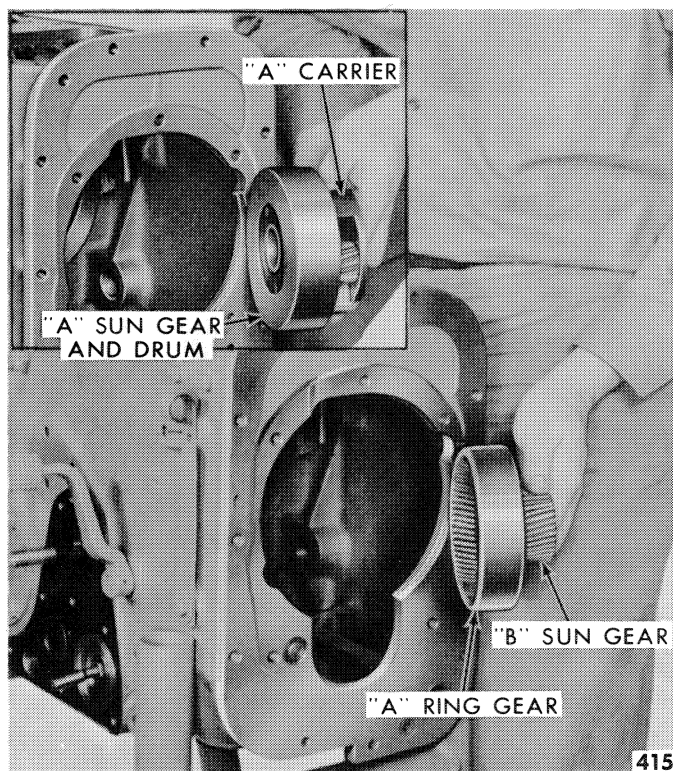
Removing the "B" Sun Gear and the "A" Planetary System
